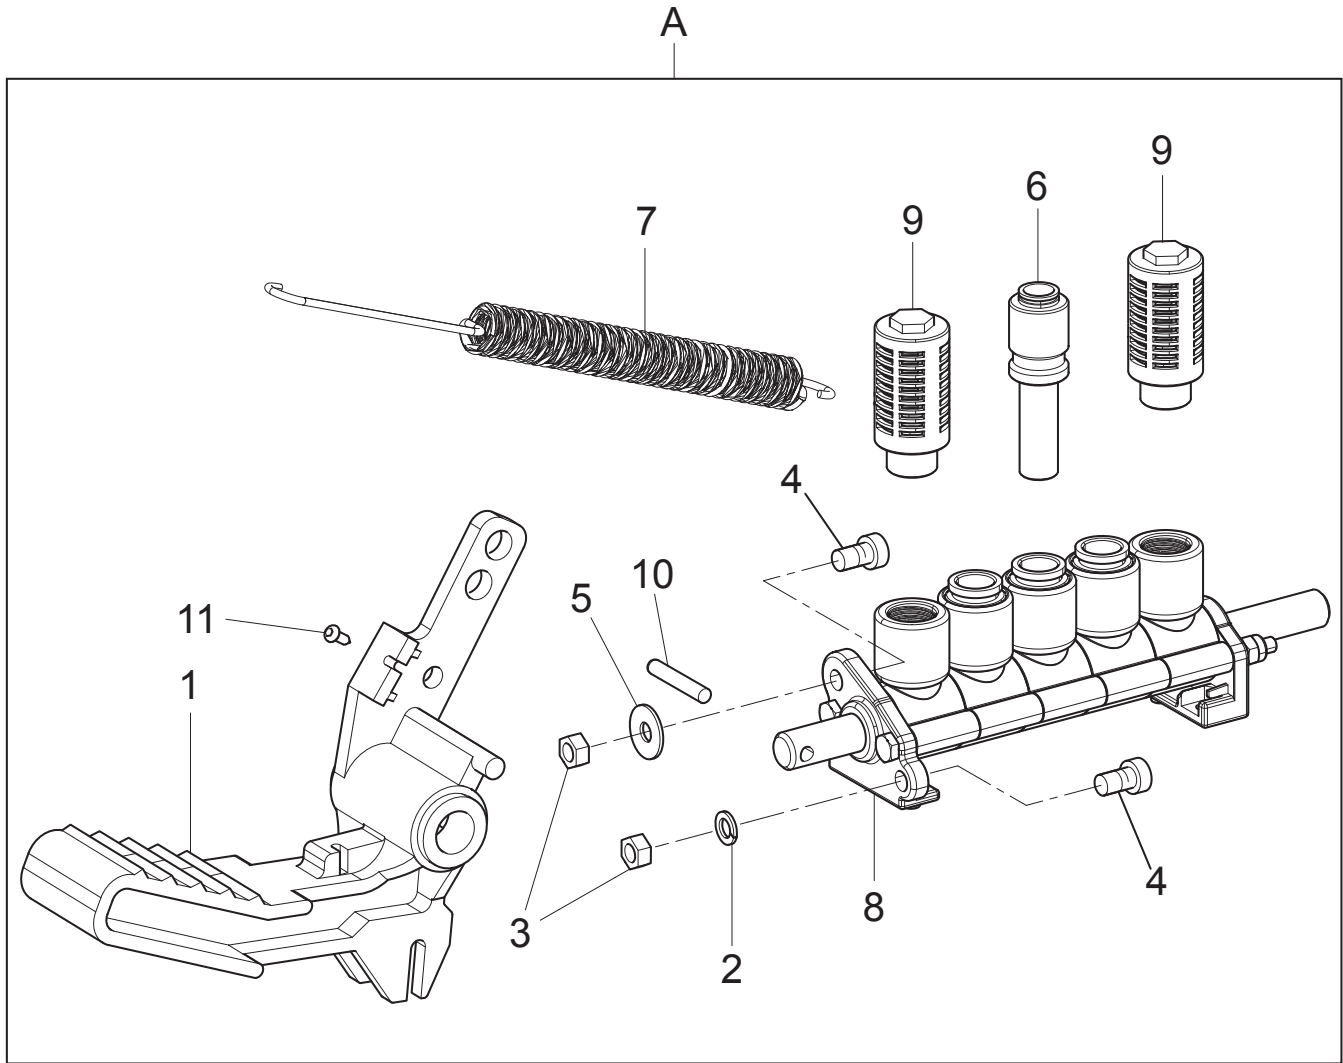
Rev. 3			VSG800A102			→	→	→
